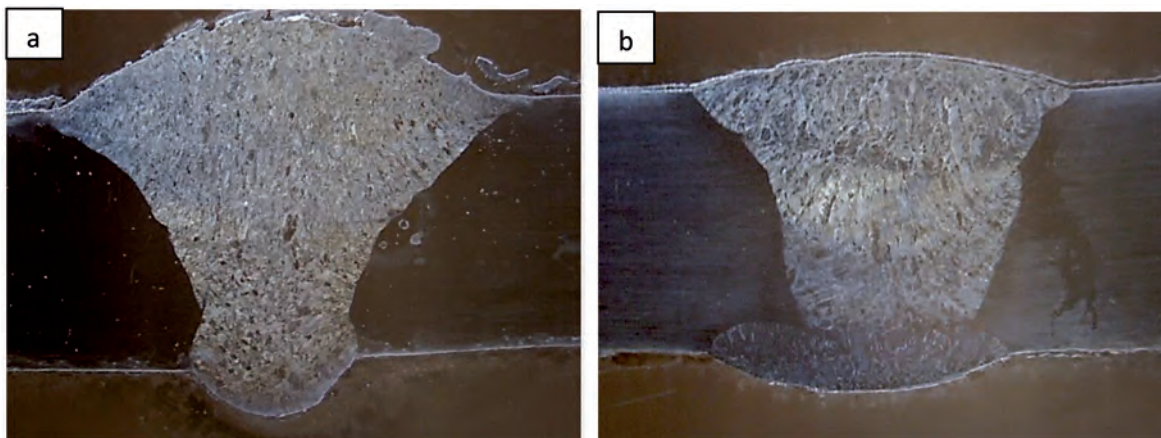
Macrostructure of the welded joint of X2CrMnNiN21-5-1: steel sample 1 (a), sample 2 (b)
